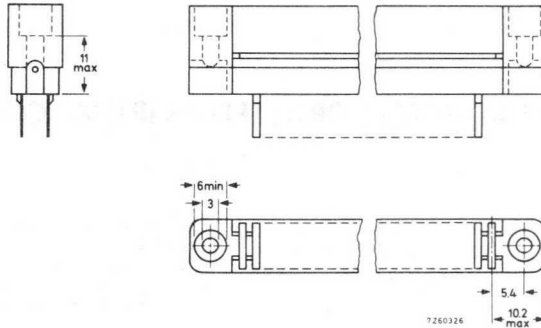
Connector with dipsolder pins, with integral mounting brackets, 2422 021 3....
